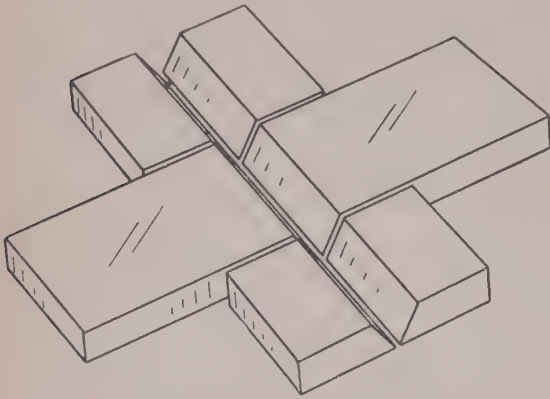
Extension pieces (run-off tabs) for butt welds containing beginning and end of weld. These should not be tack welded to the plate in which the butt weld is to be made and cut off after completion of weld
